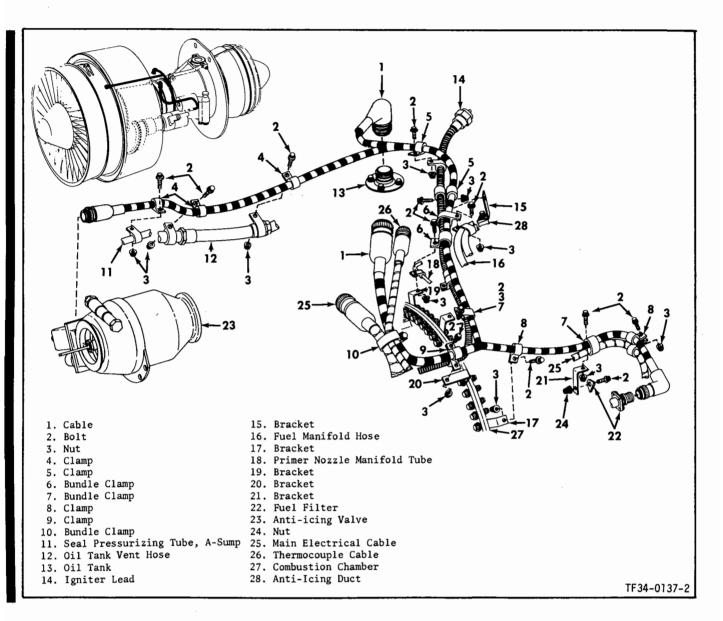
Anti-icing Valve, Oil Level Sensor and Fuel Filter Cable
